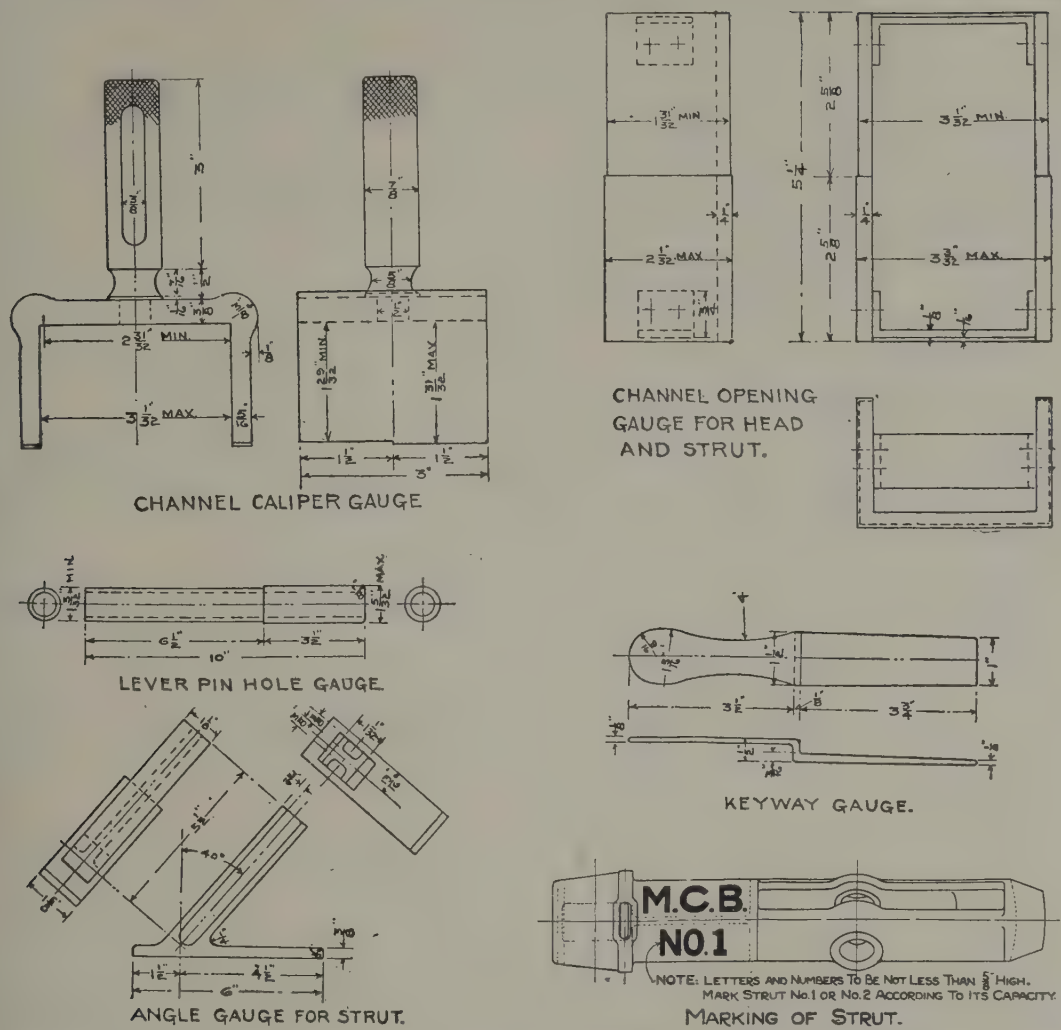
Gages for Brake Beam Channel, Channel Opening for Head and Strut. Lever Pin Hole, Keyway, Angle of Strut, and Marking of Strut. (M. C. B. Sheets 17A and 17B.)
